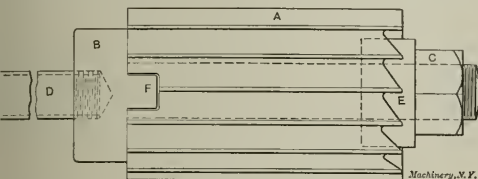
Mandrel and Handle with Hollow Mill Mounted for Hardening.
